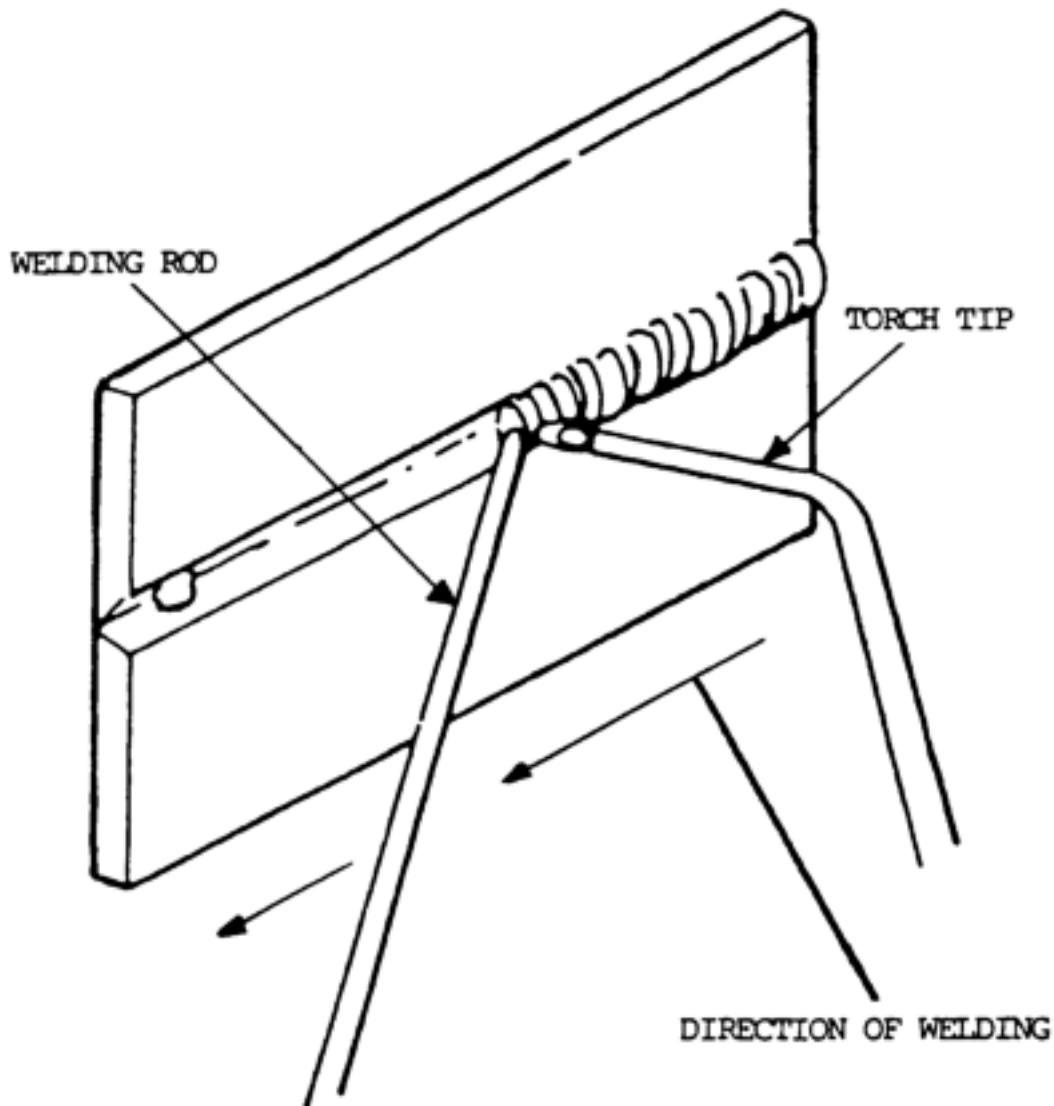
Welding a butt joint in the horizontal position.
